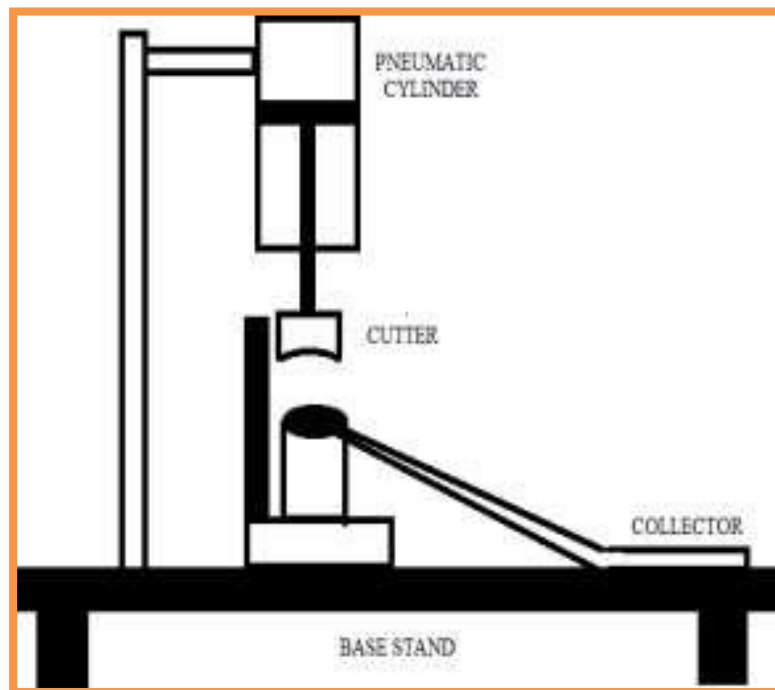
Design of Pneumatic sugarcane bud cutting machine
